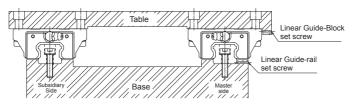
Mounting the Linear Guide on a Machine Susceptible to Vibration and Impact
